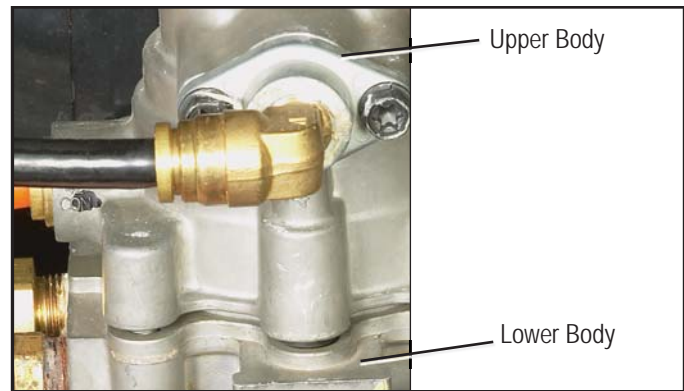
POSITIONING THE UPPER & LOWER BODY
